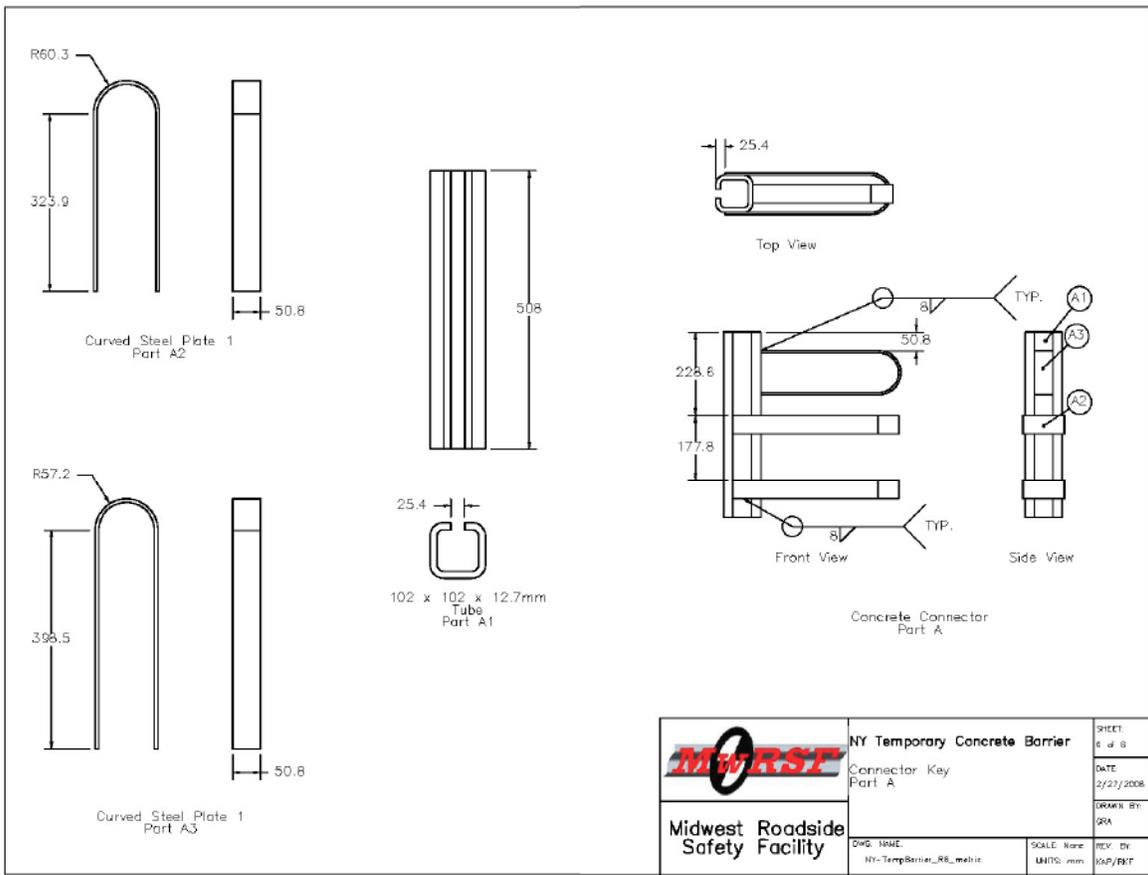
Temporary Concrete Barrier Connector Assembly Details, Test NYTCB-2
